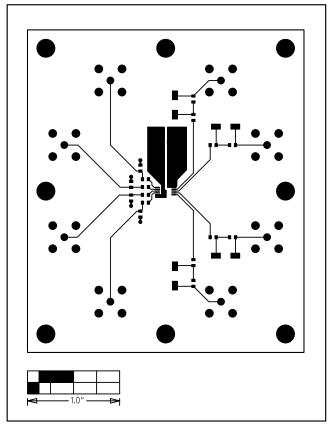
MAX9589 EV Kit PCB Layout—Component Side
